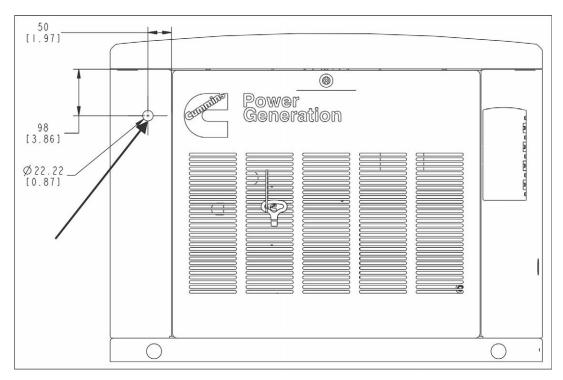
RECOMMENDED LOCATION OF HOLE FOR E-STOP (GENERATOR SETS THAT REQUIRE HOLE DRILLING ONLY)
